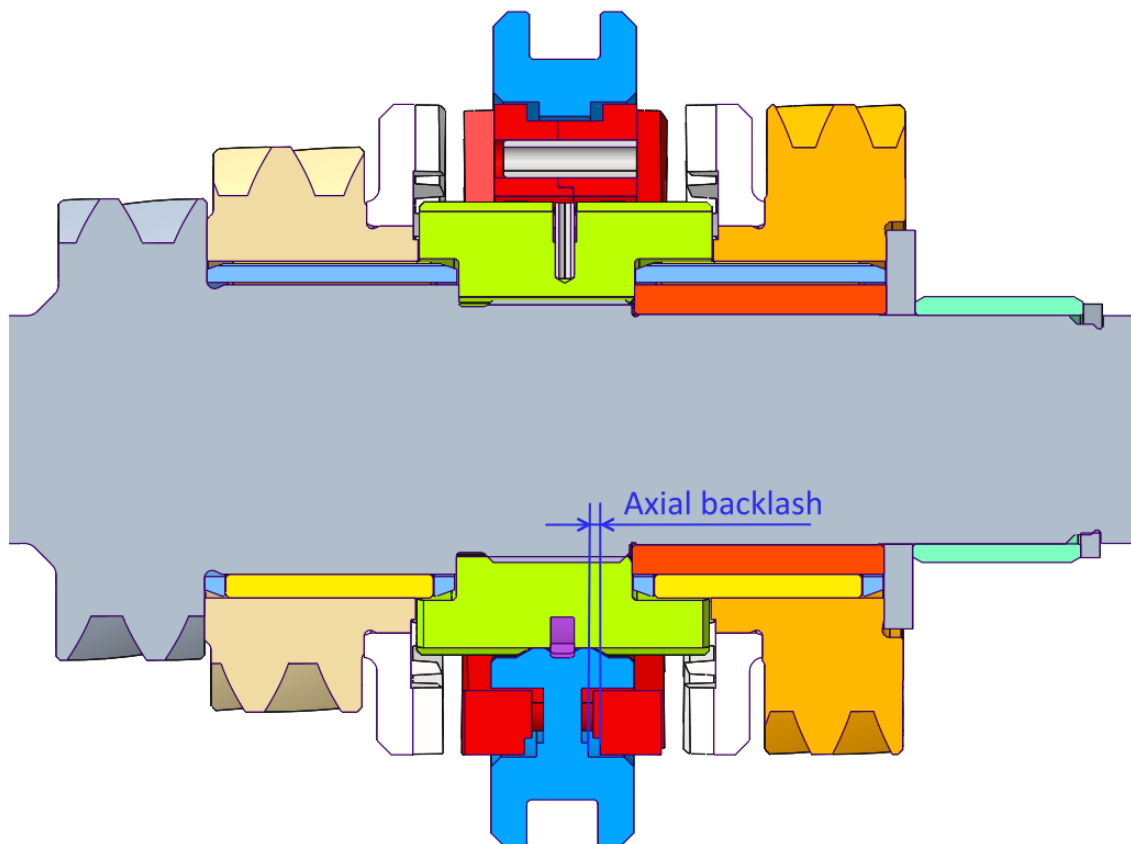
Dog clutch assembled between a pair of shifted gear wheels
